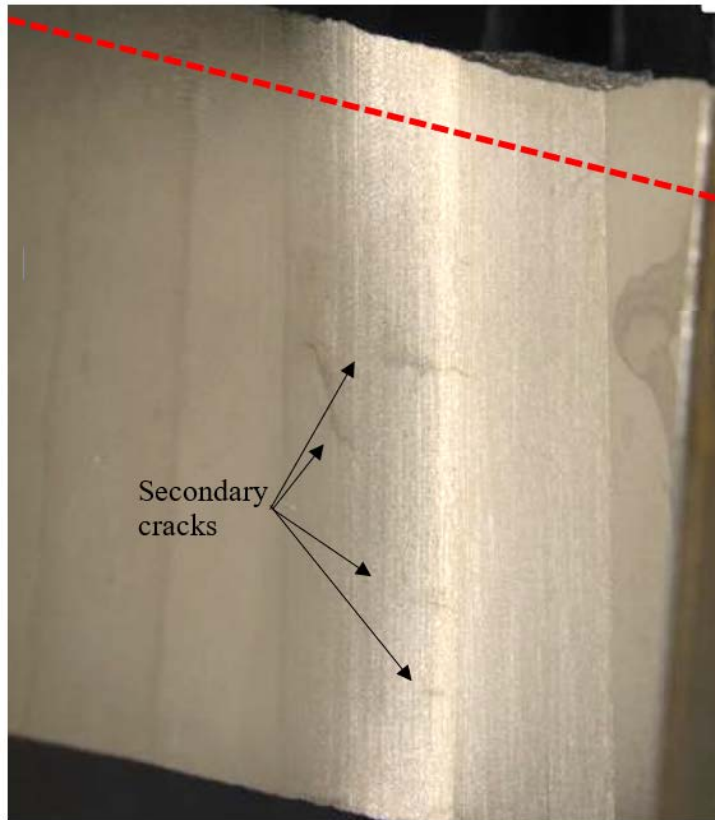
FPI and binocular examination identified multiple cracks inboard of the fracture surface. A section was made via wire EDM to remove the fracture surface from the secondary cracks for further evaluation (red dashed line).
